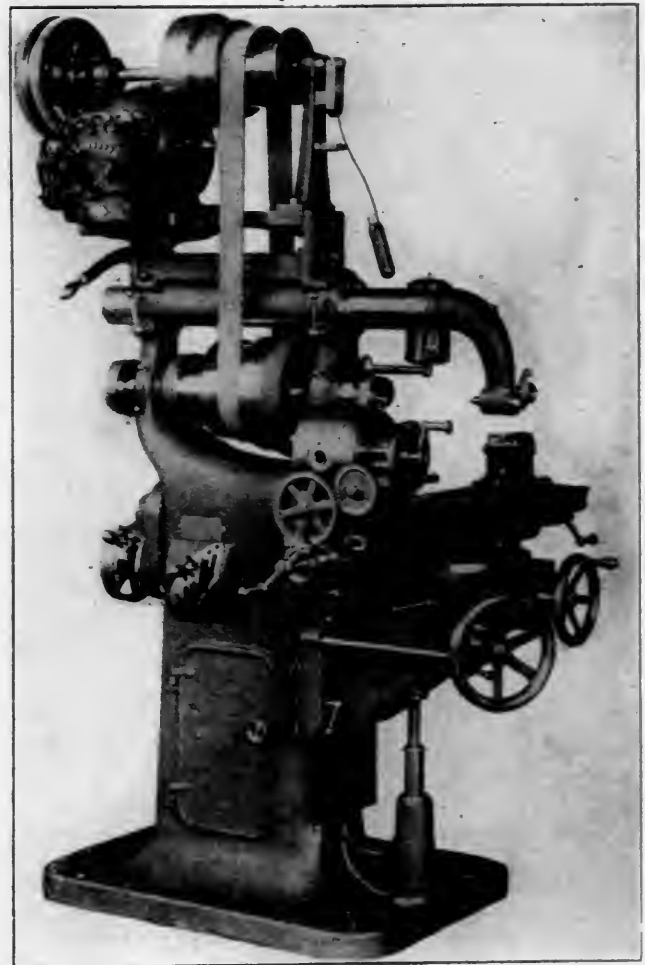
CONSTANT-SPEED DRIVE HENDY-NORTON UNIVERSAL MILLING MACHINE WITH BOTH CHANGE GEARS AND CONE PULLEYS NORTHERN ELECTRIC MOTOR.
